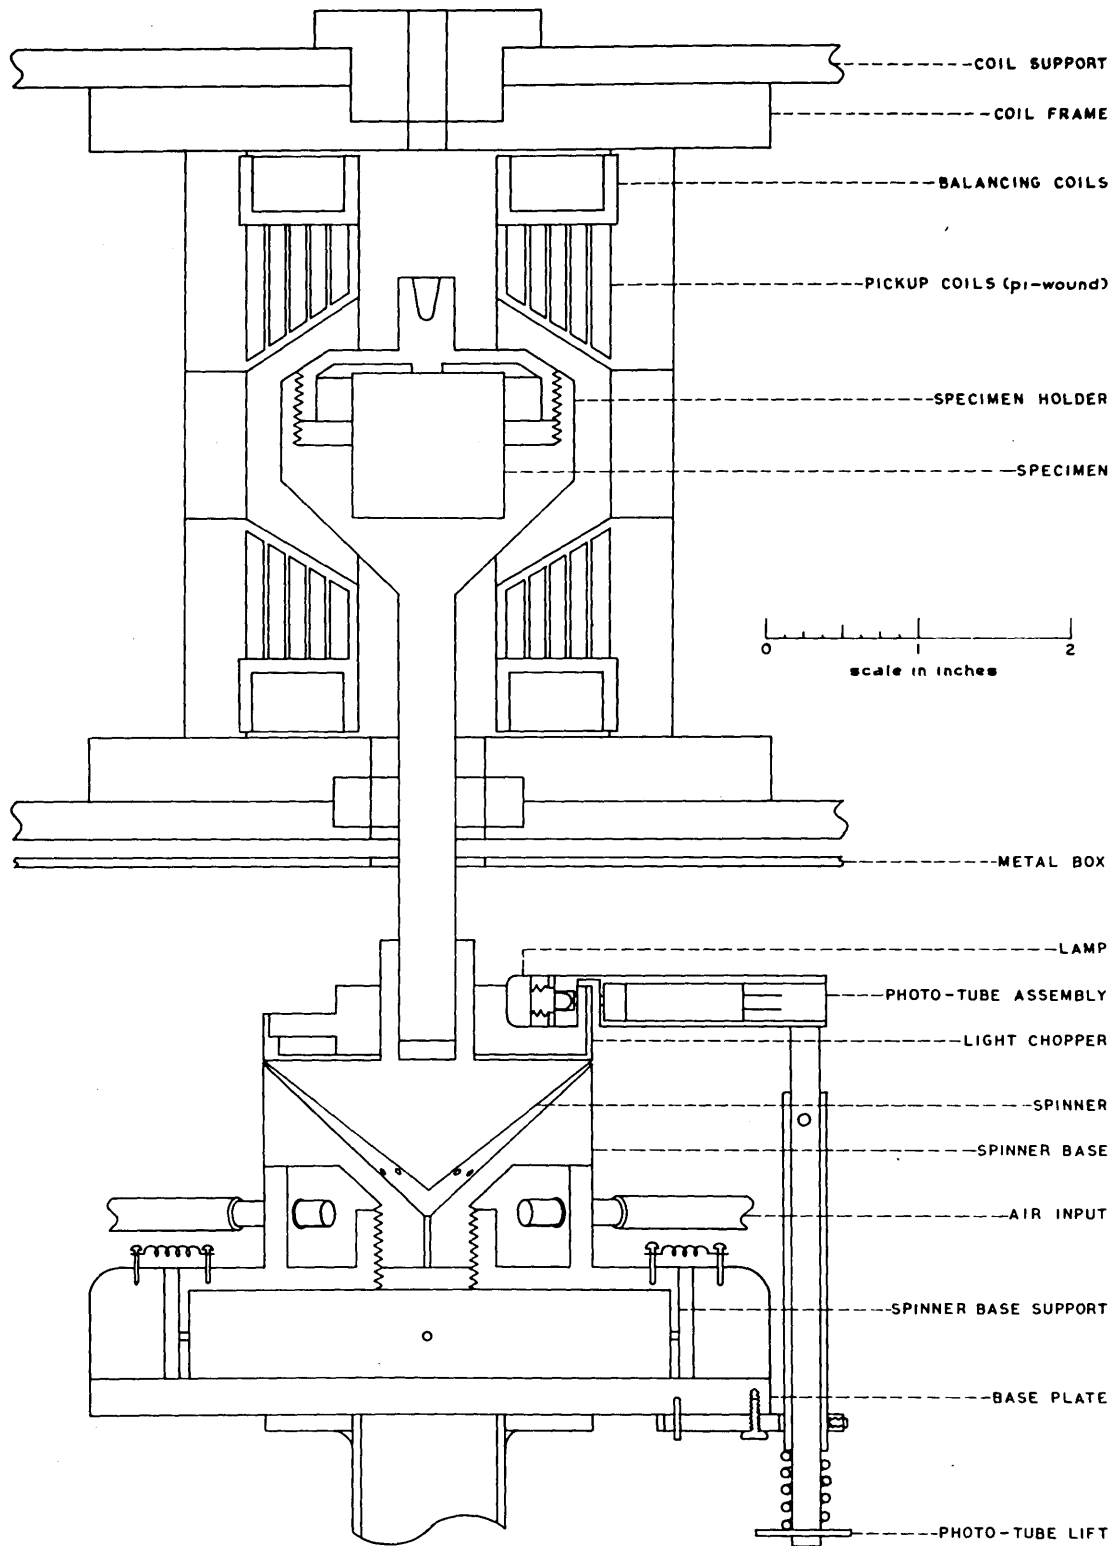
SPINNER ASSEMBLY CROSS-SECTION
